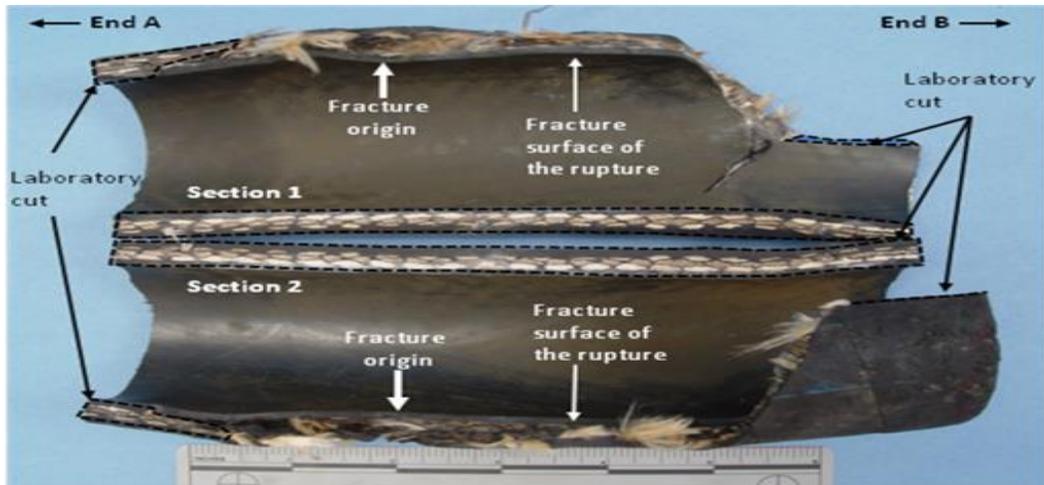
Section of ruptured accident hose cut to reveal fracture surfaces.
